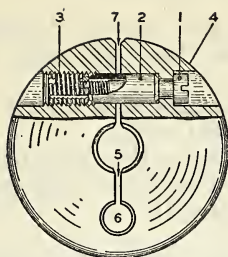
American Gage Design Standard thread ring gage locking device, details of construction, range No. 0 to $4\frac{1}{2}$ inches, inclusive
